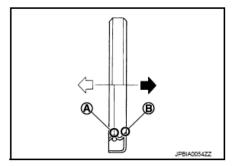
Identifying Position Of Installing Front Oil Seal Courtesy of NISSAN MOTOR CO., U.S.A.
